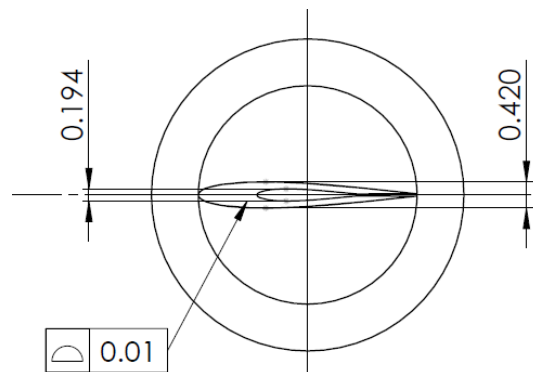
Dimensional and geometric tolerances presents in blade manufacturing
